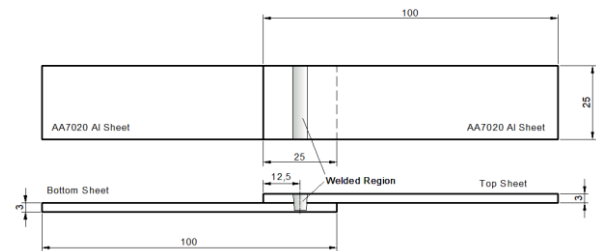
Tensile-shear testing specimen configuration (Dimensions in mm).
